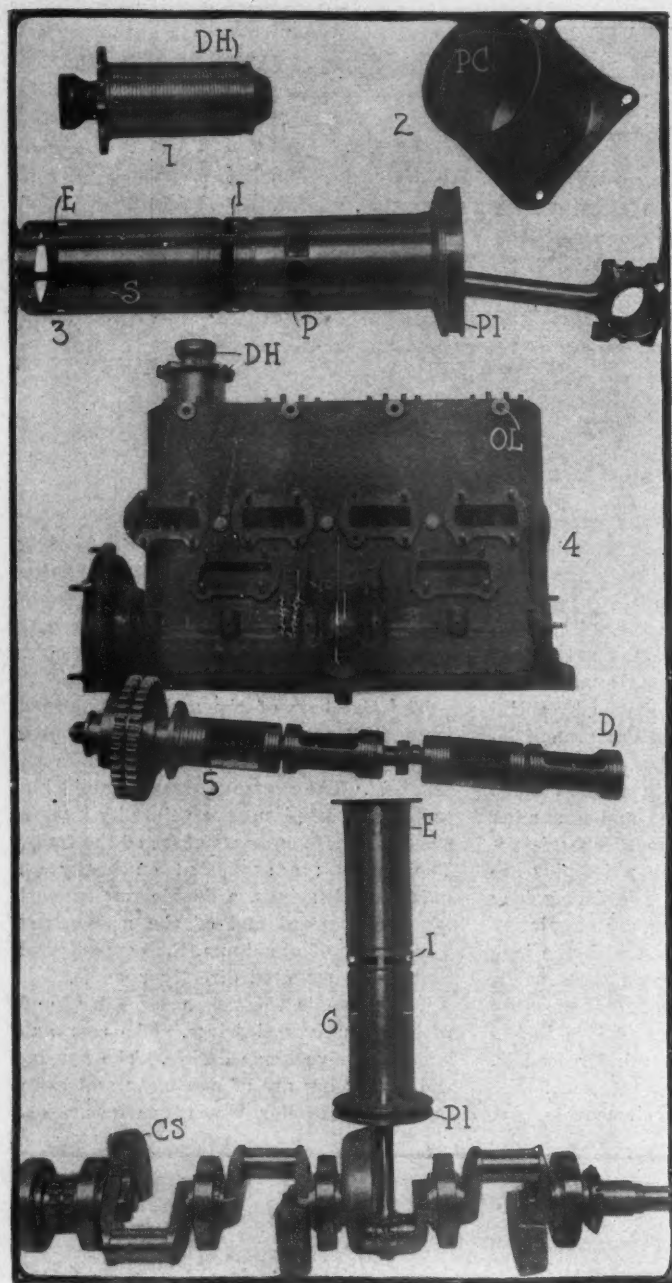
DETAILS OF SLEEVE-VALVE TWO-CYCLE MOTOR
